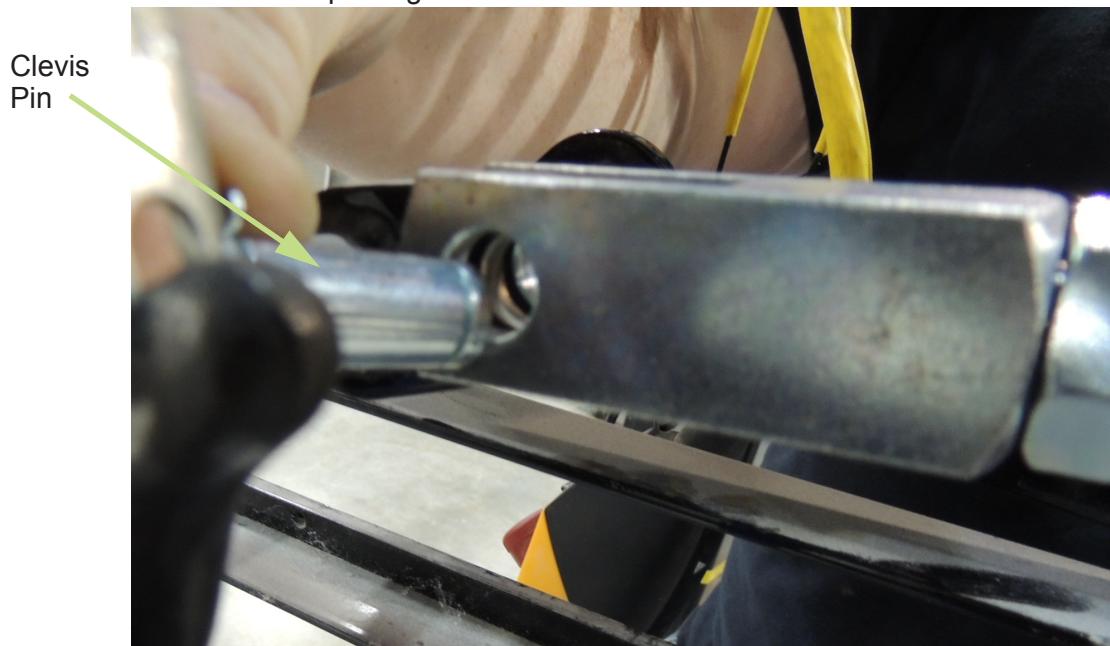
Main Cylinder - Installing Clevis Pin on Lower End
